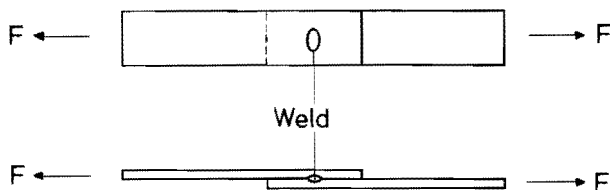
Overlapping strips with an ultrasonic weld for the tensile shear test. F is the pulling force.
